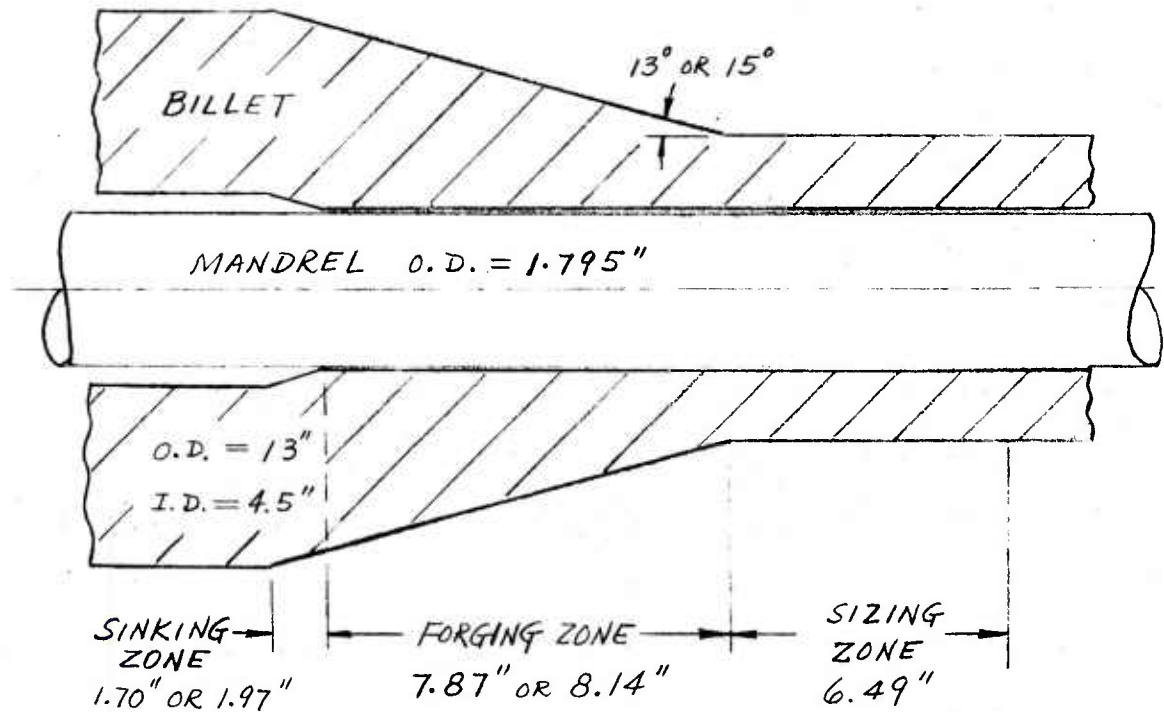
A schematic diagram of a mandrel and a billet showing sinking, forging and sizing zones.
